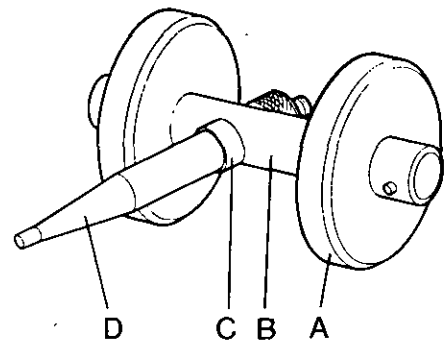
TOPSHAFT CLEARANCE ADJUSTMENT
